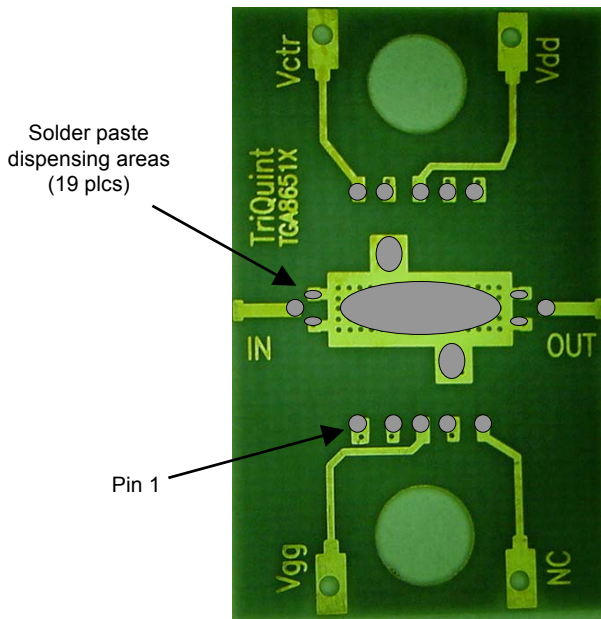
Solder paste dispensing pattern used on the evaluation board motherboard.
